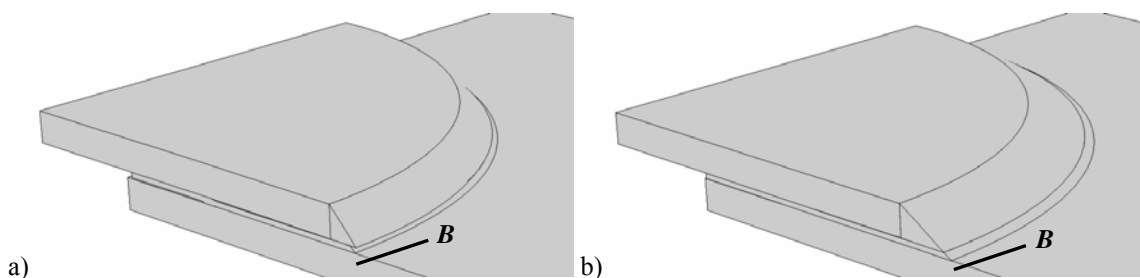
Deformed shape of the 45° (a) and 30° (b) straight fillet repairs (compressive load).
